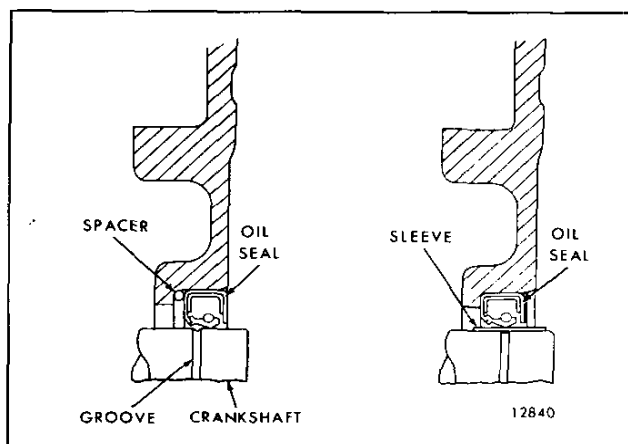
Use of Rear Oil Seal Spacer or Sleeve on Grooved Crankshaft (8V-53 Engines)
